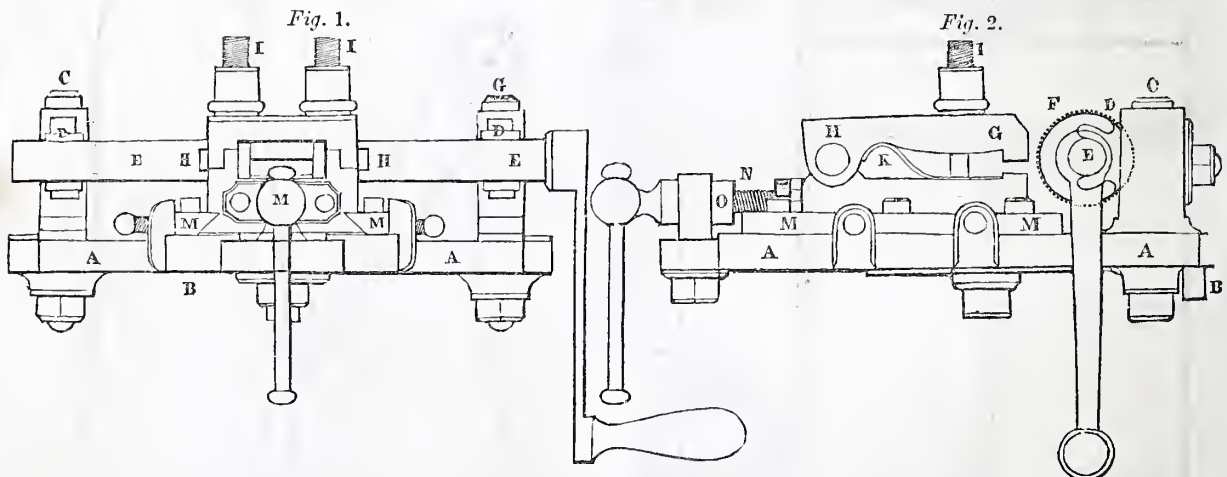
is a front view of the machine; fig. 2 is a side view. A A is the sole-plate of the machine, with a projection, B, cast on its under side, by which it may be held firmly in a vice when in use. To this plate are fixed two standards, C C, with vertical grooves in them, by which the bushes, D D, sliding in them, are adjusted to the level required, and then fixed by screw nuts behind. These bushes, being half round, are open in front, so as to facilitate the removal and replacing of the spindle E E, which runs in them. This spindle is truly cylindrical, and without ruffs, except in the middle, and thus it is free to move lengthways in the bushes. On the middle, which is of a larger diameter, the cutting barrel, F, is fixed by a key seated on the spindle, and by a nut screwing it tight against a ruff. The barrel is of the usual construction, the threads being cut into rows of teeth parallel to the axis, and both sides of the teeth thus presenting cutting surfaces. G H is the vice for holding the comb intended to be cut. The upper jaw is hinged to the under at I I; they are screwed together by the bolts and nuts J J, the bolts being tapped into the lower jaw. In fig. 2,
